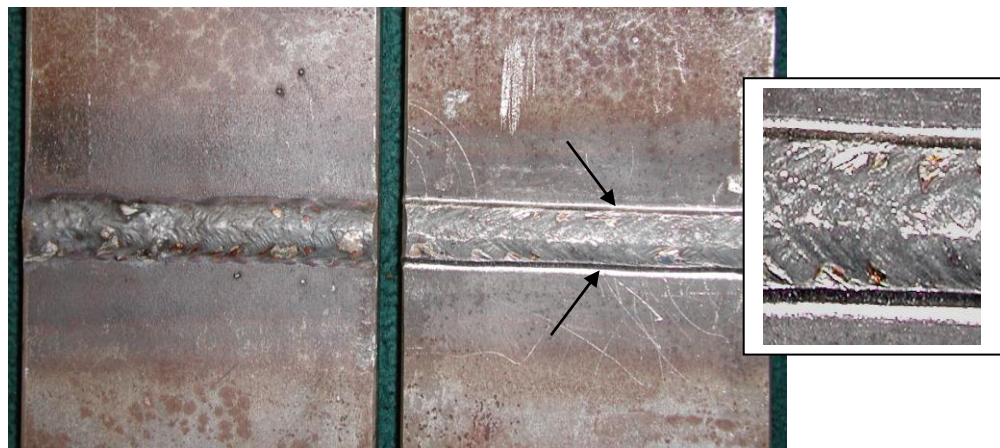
The view of the butt welds in as-welded condition (left side sample) and after application of UP (right side sample) [7]. Notice the formation of a uniform, shiny groove along the weld toe marked with arrows and shown in greater details in the insert.
